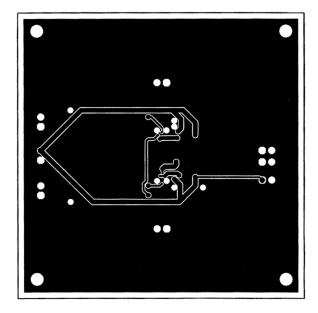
Recommended MH PC Board Layout: Upper Inner-Layer Layout
